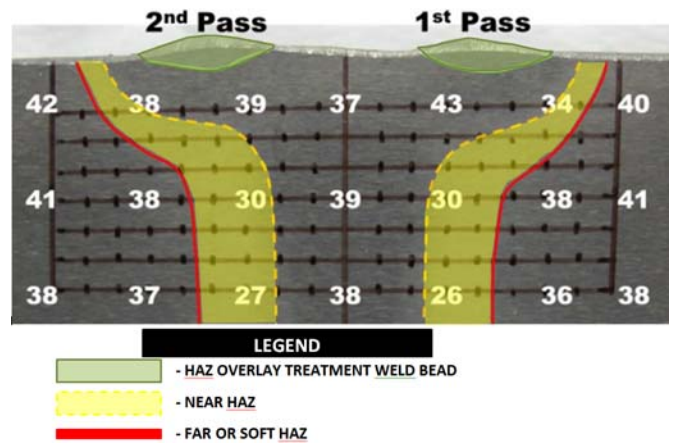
Diagram showing Vickers Hardness Measurements of a Treated EFB Weld Cross Section
